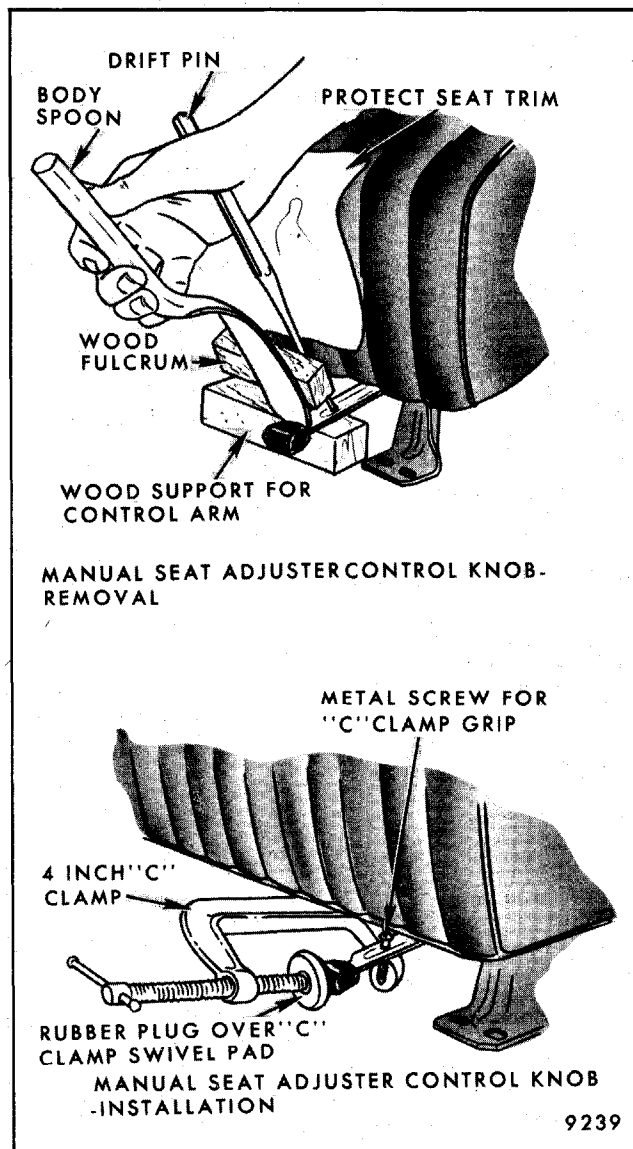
Front Seat Adjuster Control Arm Knob - Removal and Installation
